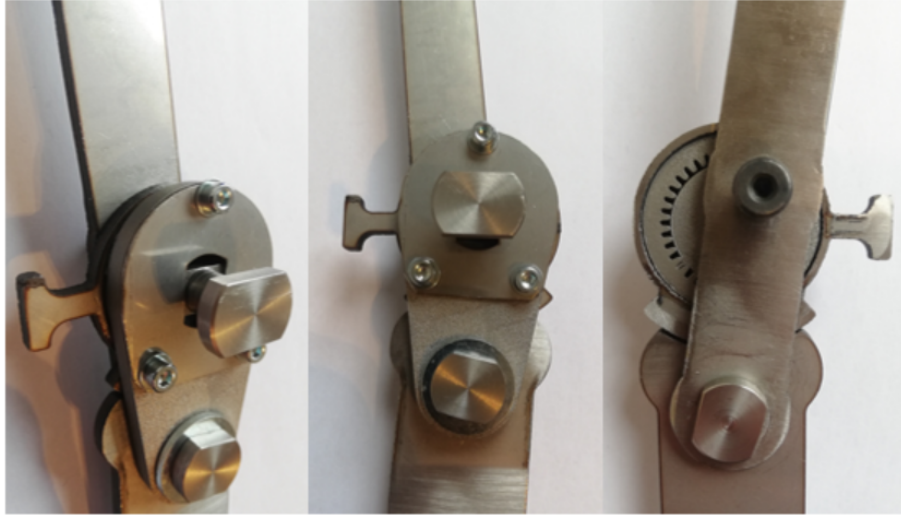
The final prototype. The housing and gear are 3D-printed from 316 steel, the locking ring, upper and lower bar are laser cut, and the central axle and pull-out grip are turned on a lathe.
